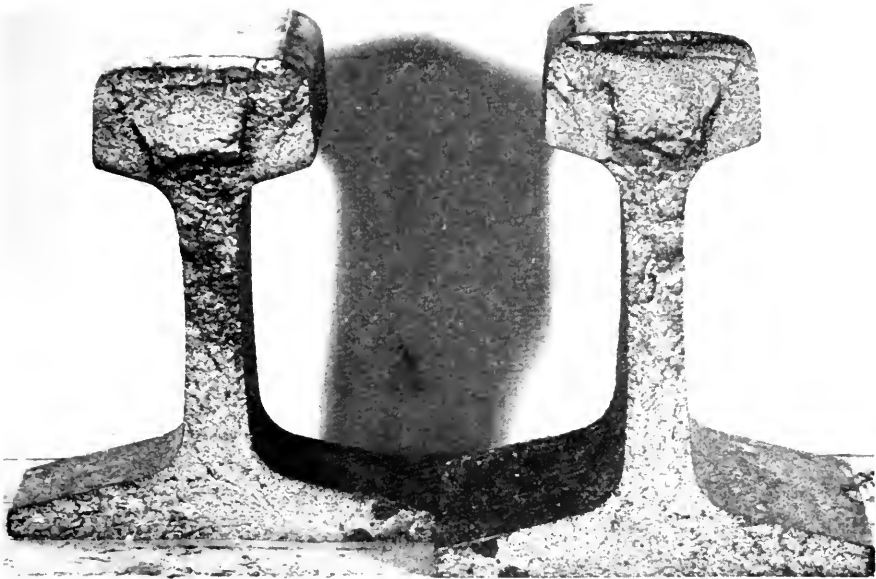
(Investigation 136-25)—Fractured faces of a failed electric flash butt welded rail joint showing a discolored area in the base which indicates that an electrode burn is present.
